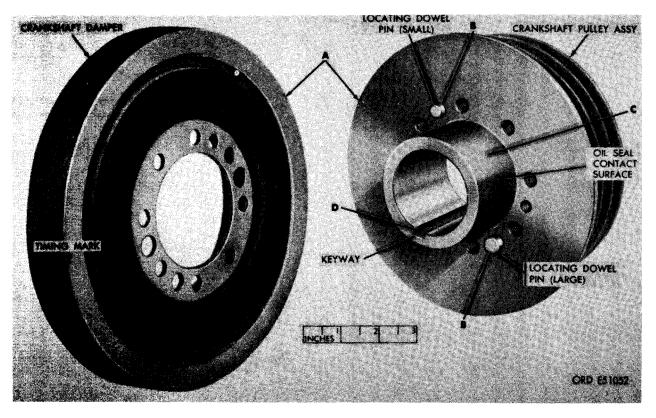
DISASSEMBLING, ASSEMBLING, AND INSPECTING CRANK-SHAFT DAMPER AND PULLEY ASSEMBLY.
